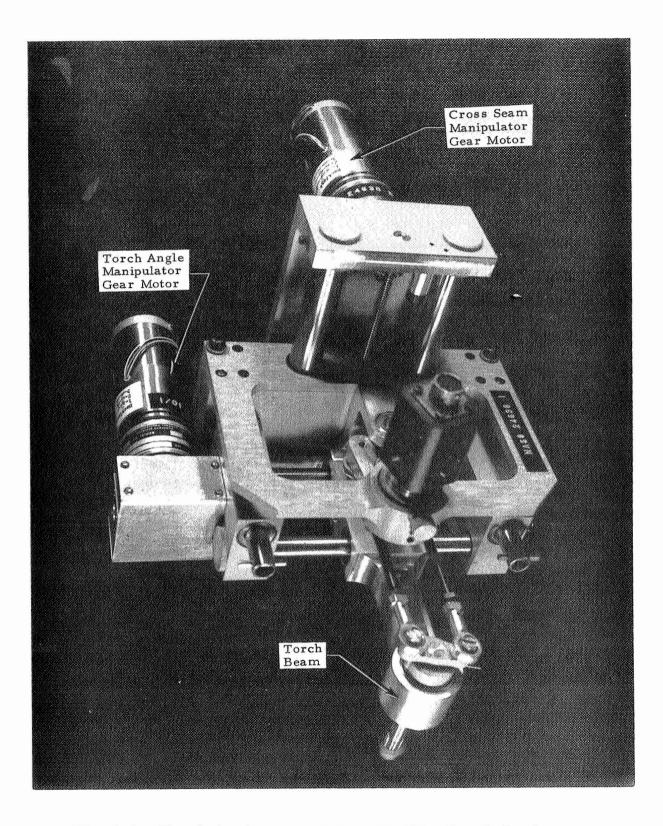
Torch Angle Manipulator, Modification B Configuration
